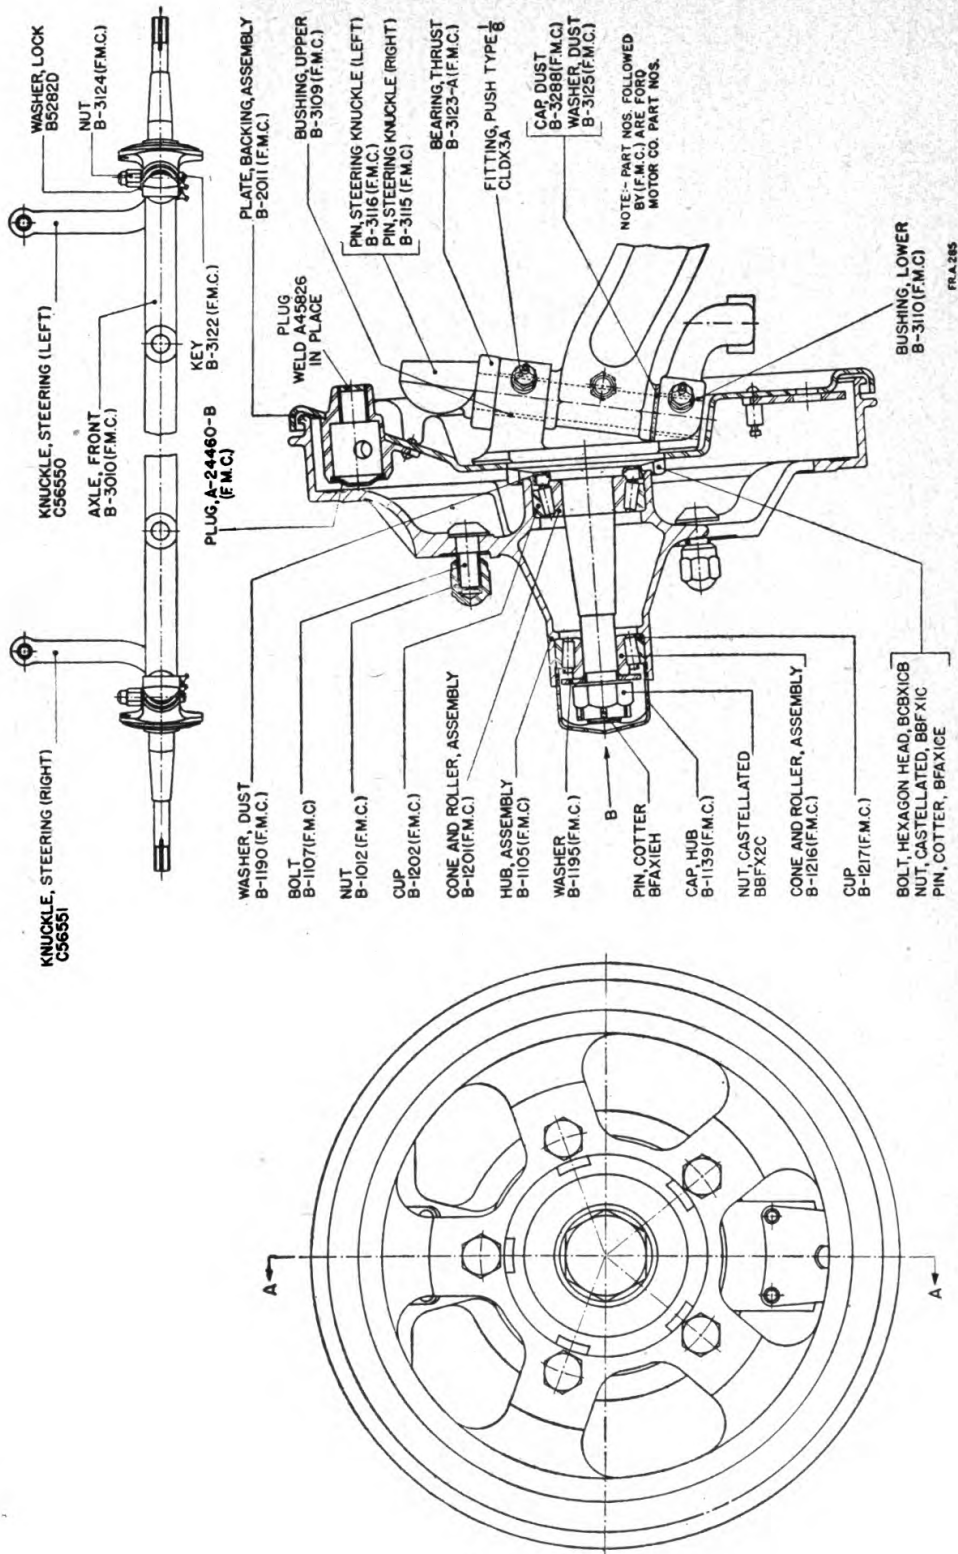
Sound locator trailer, M3—front axle— assembled and sectioned views.
